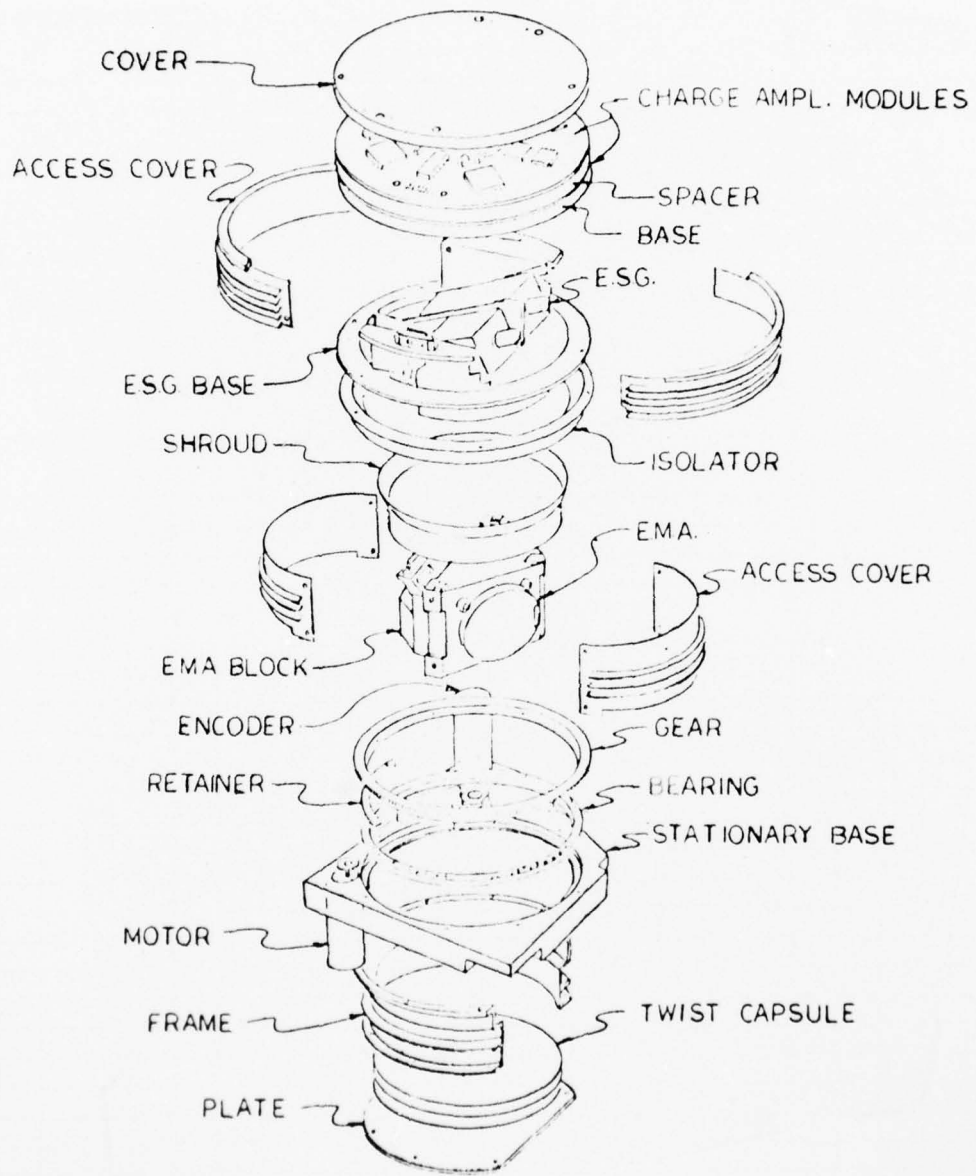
Rotating Instrument Assembly Unit (Exploded View)
